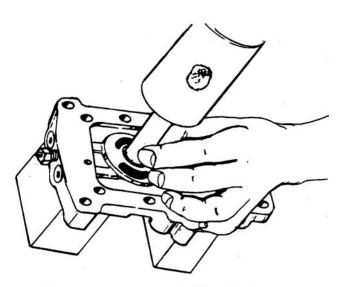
Removal of Needle Bearing 6-3.12 Assembly of Sundstrand BDU-10S.
